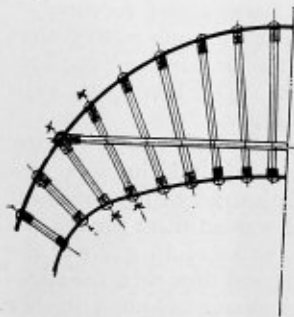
Section Through Radial Stay Boiler, Showing Cross Braces
